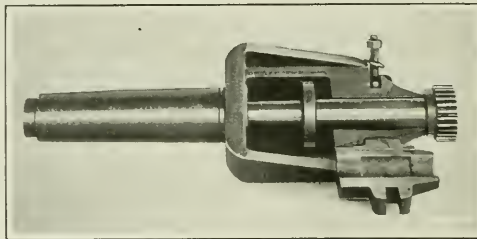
Special Device for holding a Turret-driving Sleeve when cutting Gear Teeth
